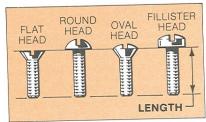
Machine screws have greater holding power than other types of screws that fasten to metal.
